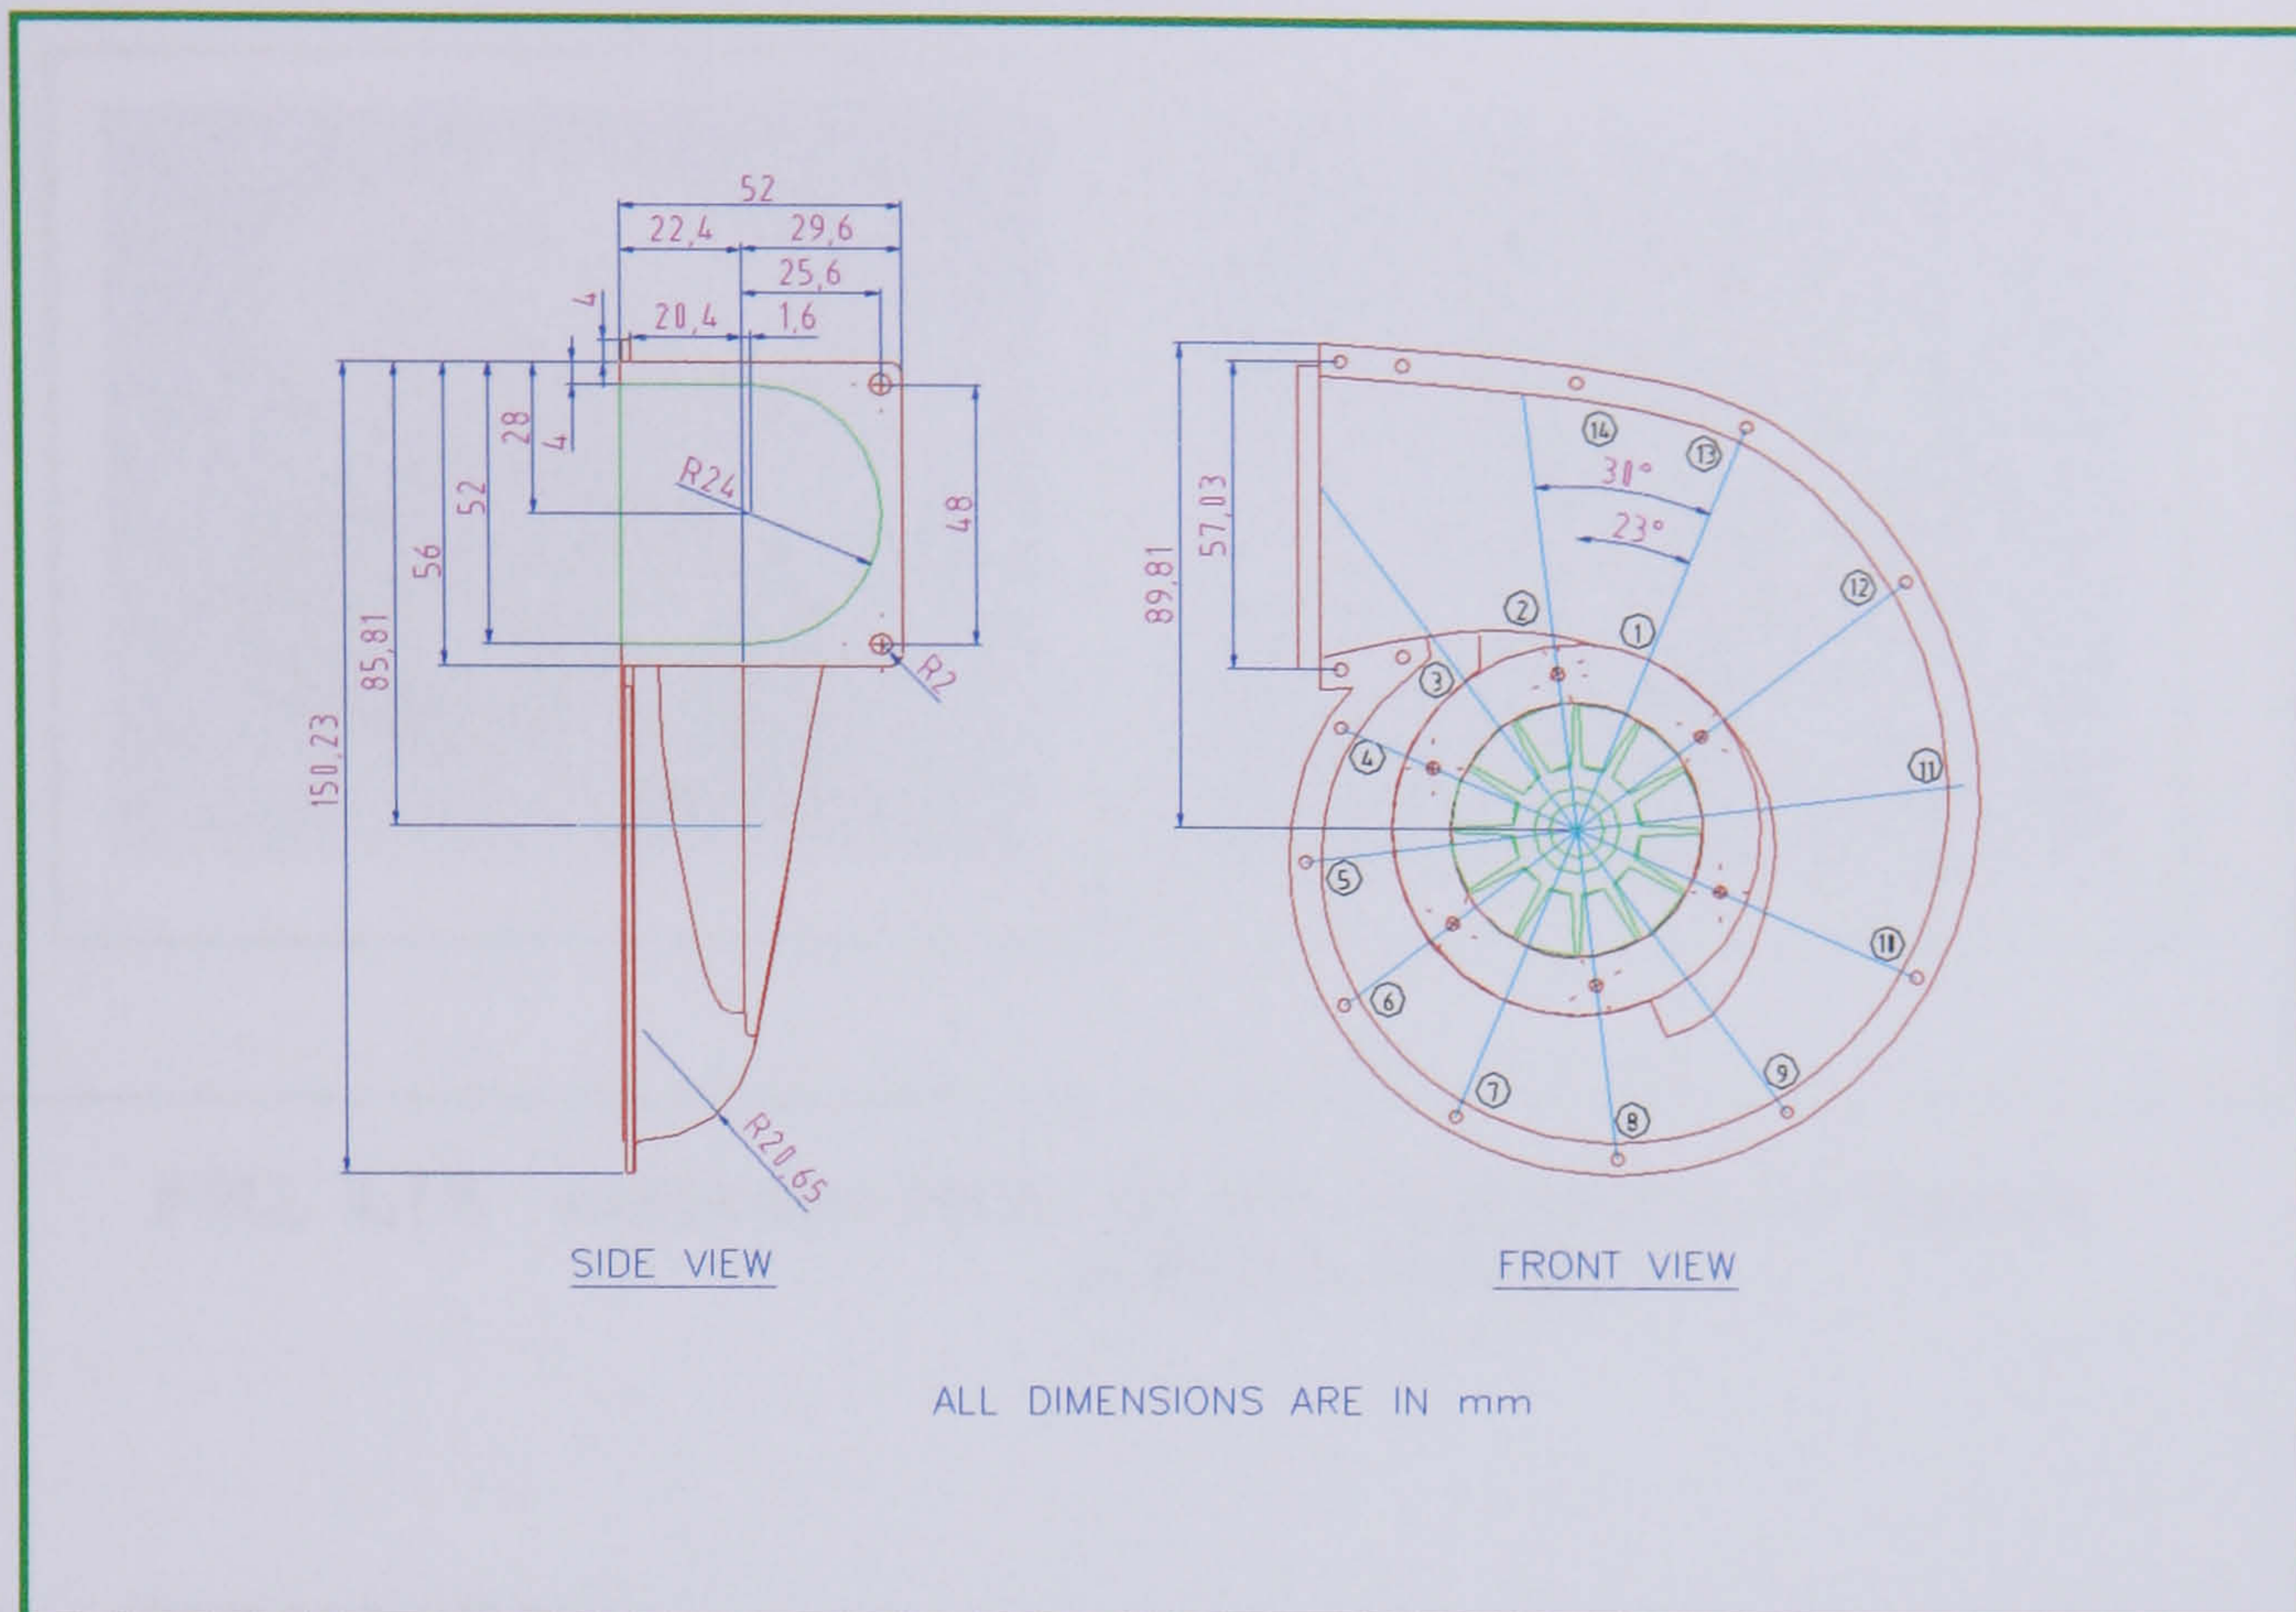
DESIGN SCHEMATIC DRAWING OF THE OF IFR TURBINE ASSEMBLY
